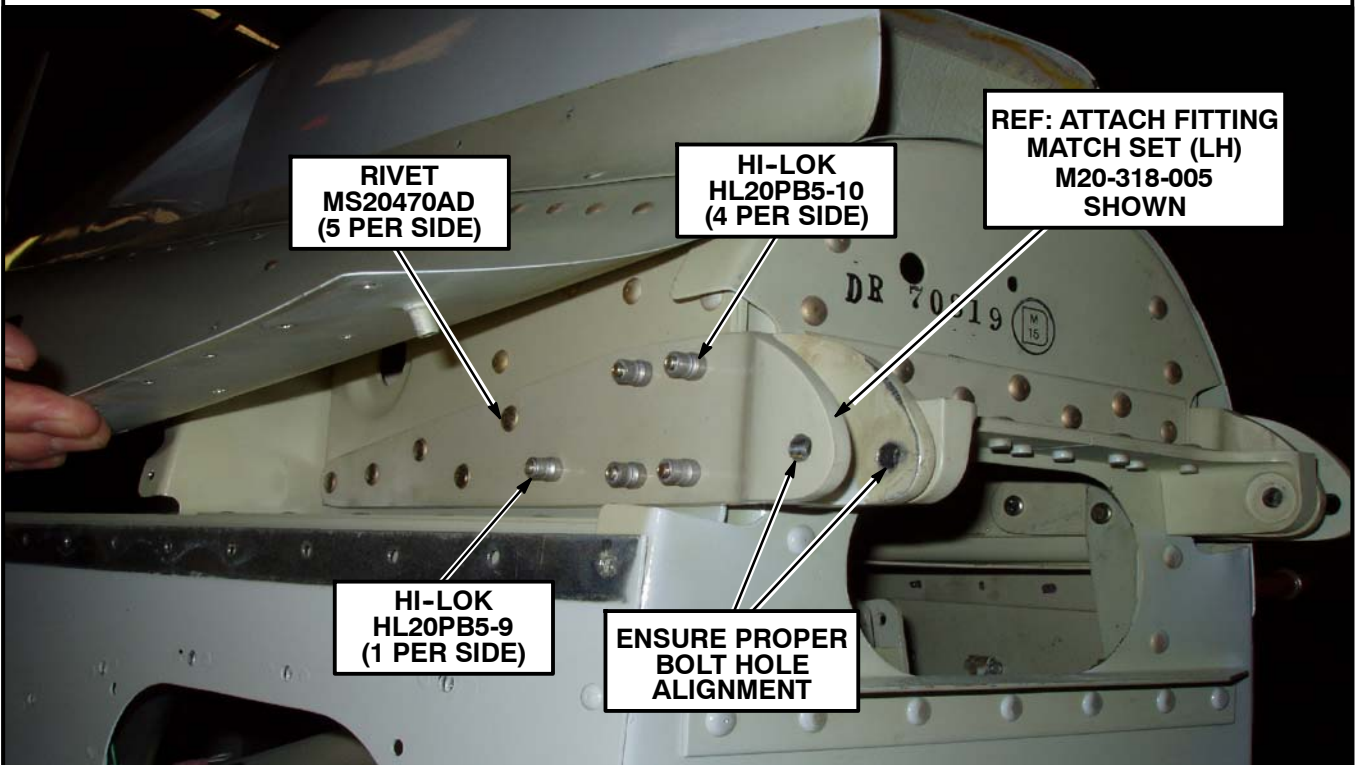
EMPENNAGE TRIM ATTACH FITTING MEASUREMENT AND FIXTURE
